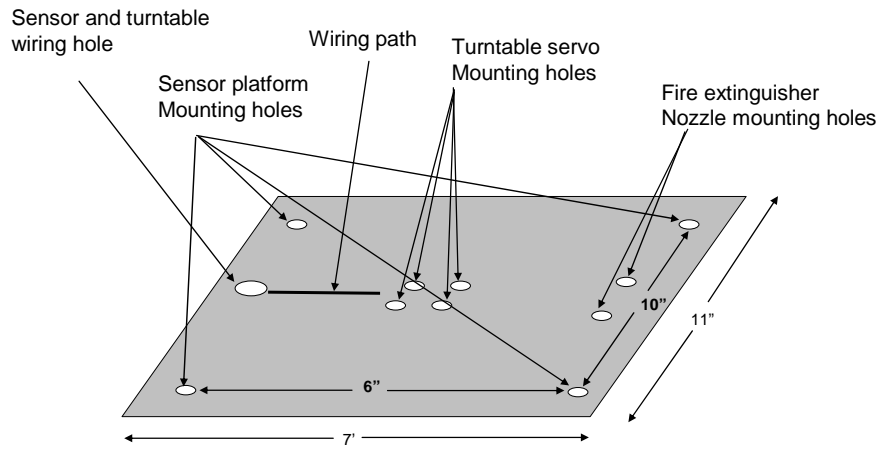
shows the base platform for the robot. It will be constructed using aluminum and shows the tooling requirements for the mounting holes and other needed parts. Figure 4 shows the sensor turntable platform which will also be constructed using aluminum. These two parts will be connected using 6" bolts to create the elevated platform. Figure 5 shows the protected electronics area. This is where the PCB and sensitive components will be placed to protect it from the heat from the fires as well as from the chemical from the extinguisher. The rear of this cube will be easily removed to allow easy access to the electronic components.
